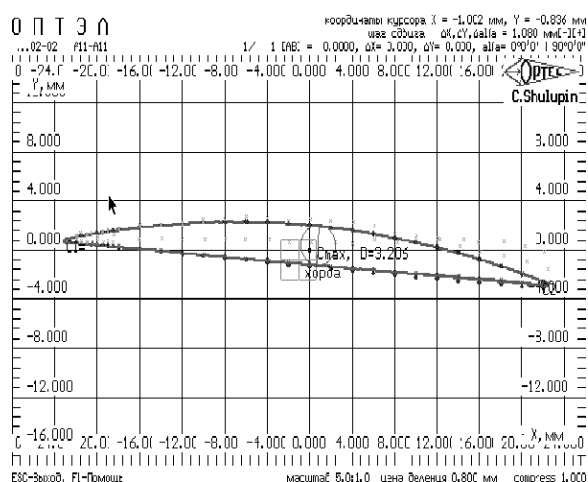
2D view of compressor blade section profile with points of drawing.
